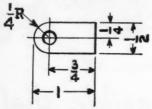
Drawing of blanks for which the die shown in Fig. 7 is designed.
